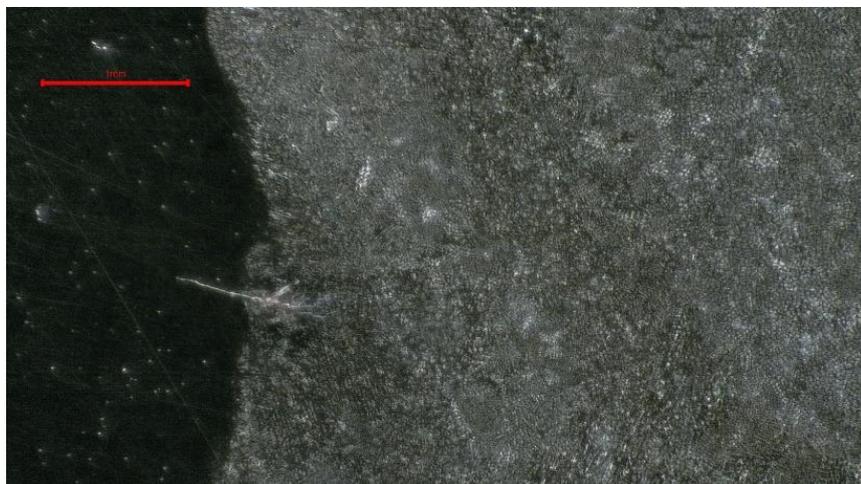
Crack in the weld's end at the left side of second test specimen.
